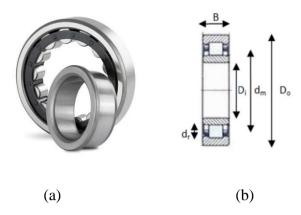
(a) NU205E.TVP2.C3 cylindrical roller bearing with detachable inner ring (b) Schematic cross section of the bearing
